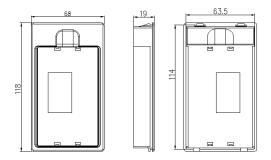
Keypad tray installation opening size 63.5\*114 (mm)
